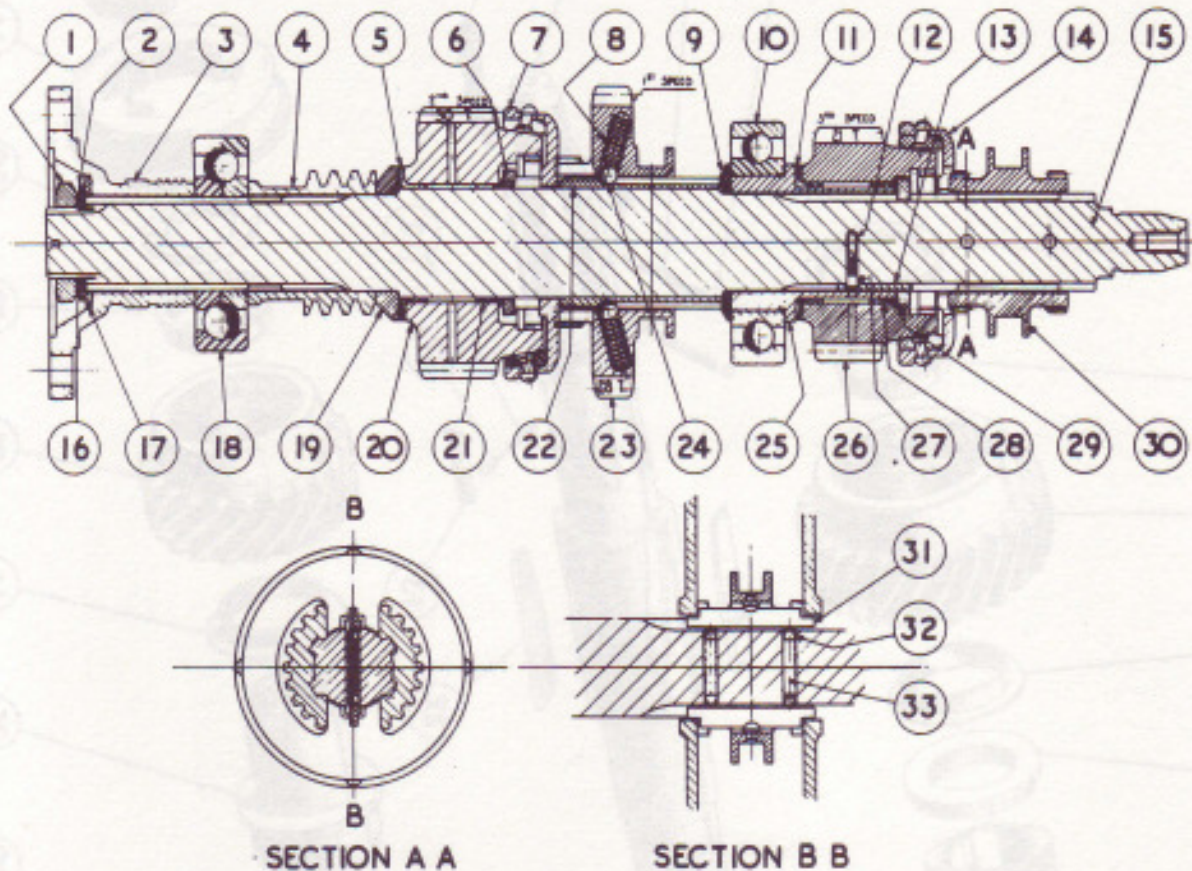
SECTION - 3RD MOTION SHAFT. (EARLY TYPE)
